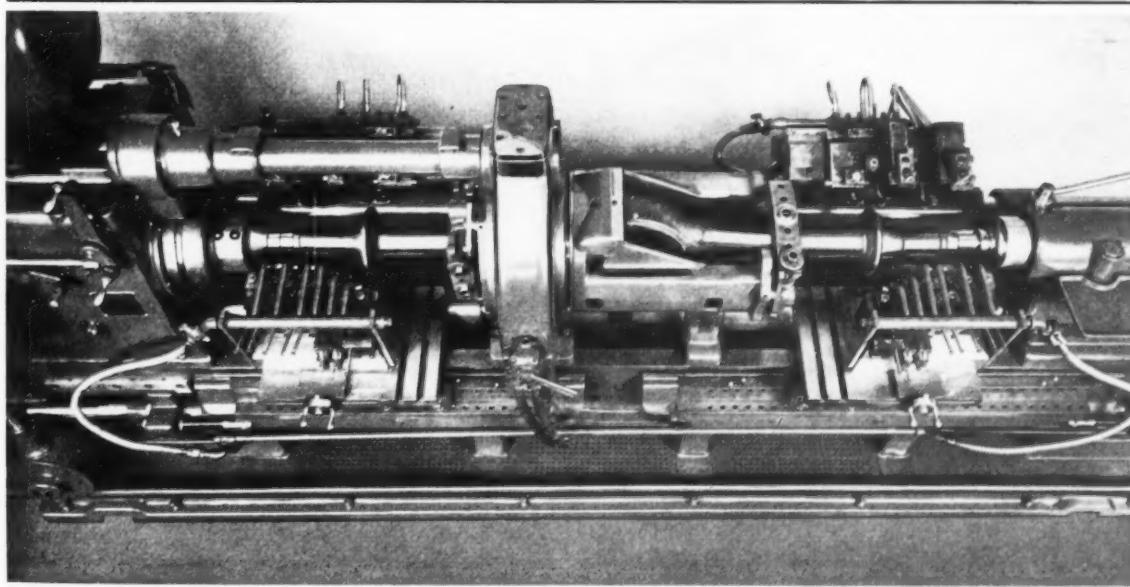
Set-up Used on Lathe Shown in Fig. 1 for Performing Second Operation on Ends of Rear-axle Housing
